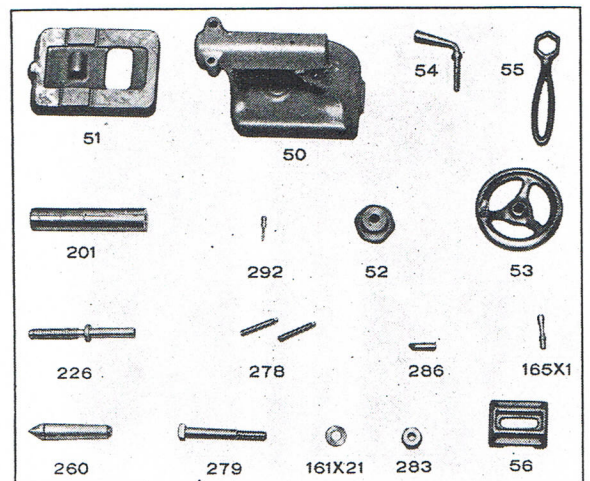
Tailstock Parts for 9' "Workshop" Lathes.
